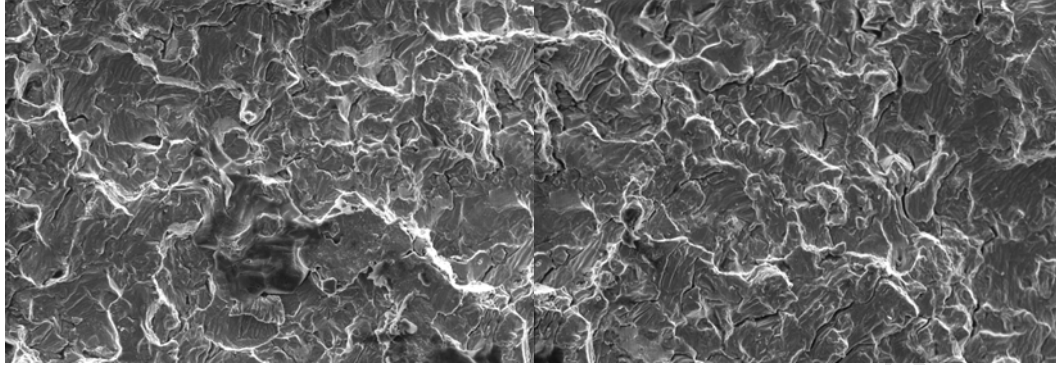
Adjacent fractographs of the fractured Ti-6Al-4V specimen used to analyse the fracture
